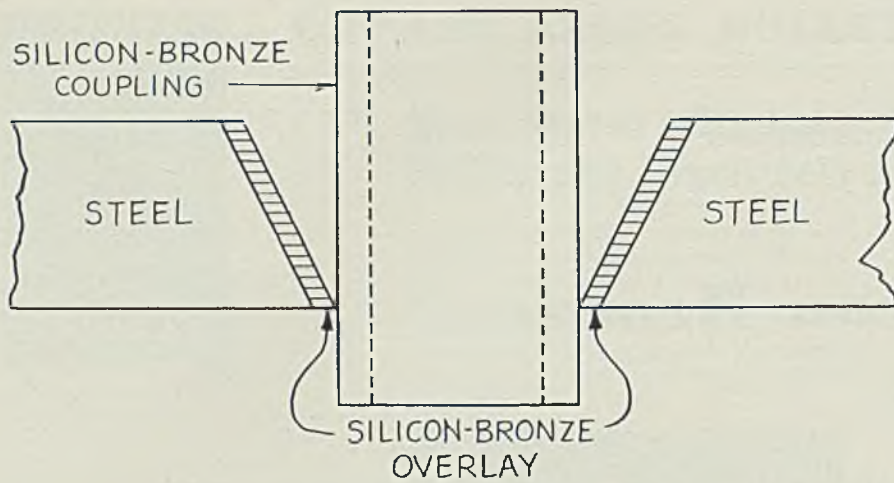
Method of welding a bronze coupling, collar or outlet to a steel tank or other fabrication
